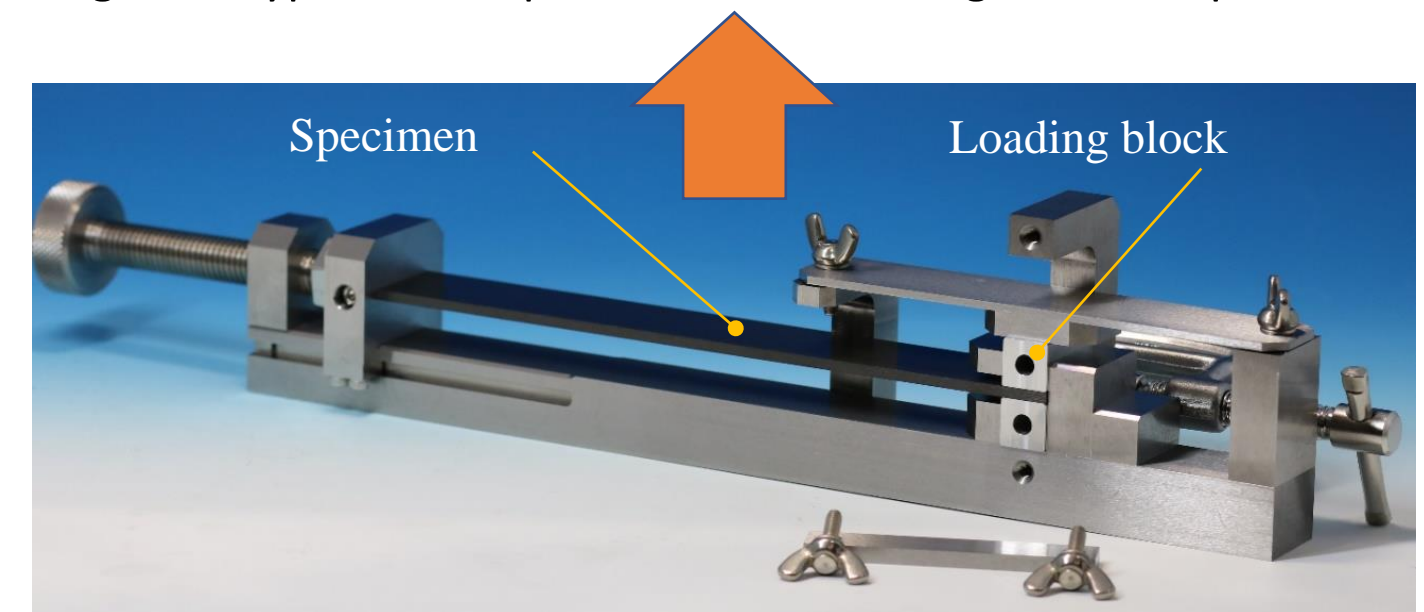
An example of adhesive fixture introduced in technical note of JIS K 7086 -1993
